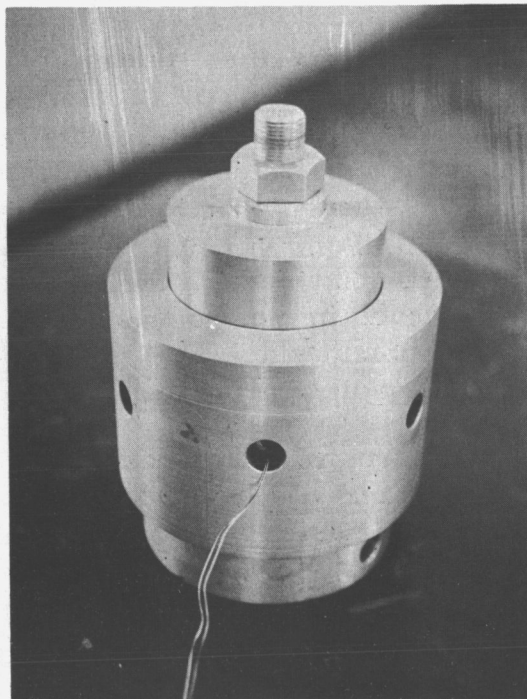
Flange-type Connection Ready to Shoot With Protective Cover in Place.
